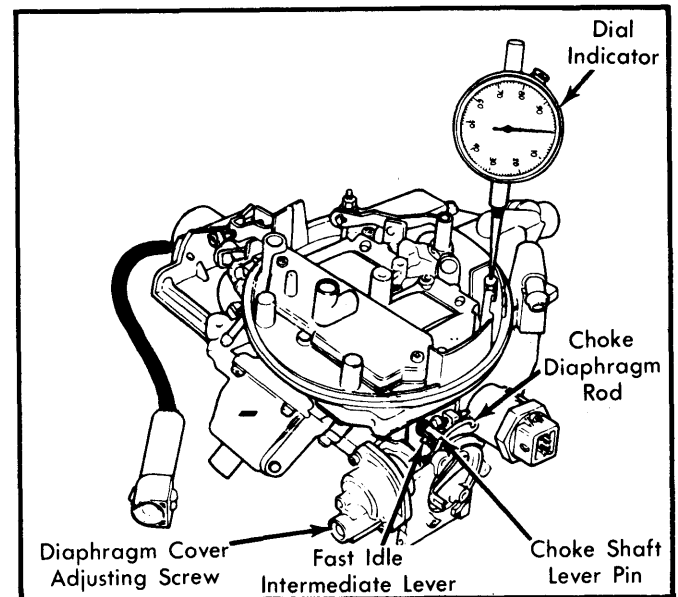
Adjusting Choke Control Diaphragm (At Zero°F Position)
